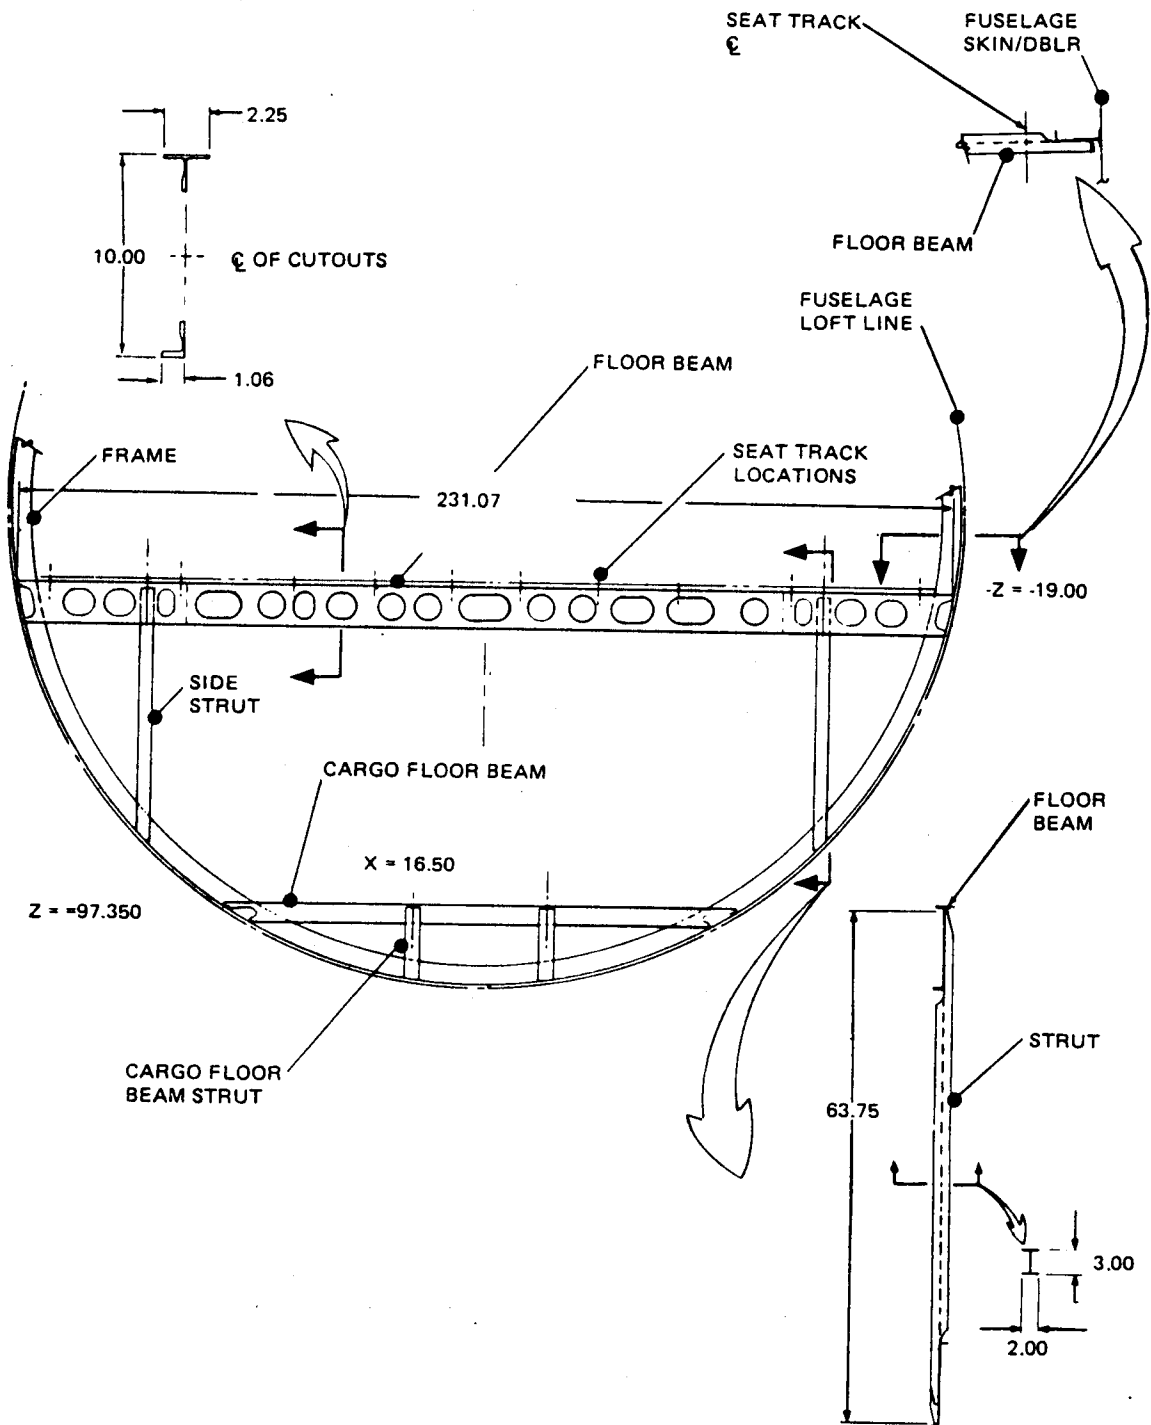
GENERAL ARRANGEMENT OF FLOOR BEAM AND STRUT
